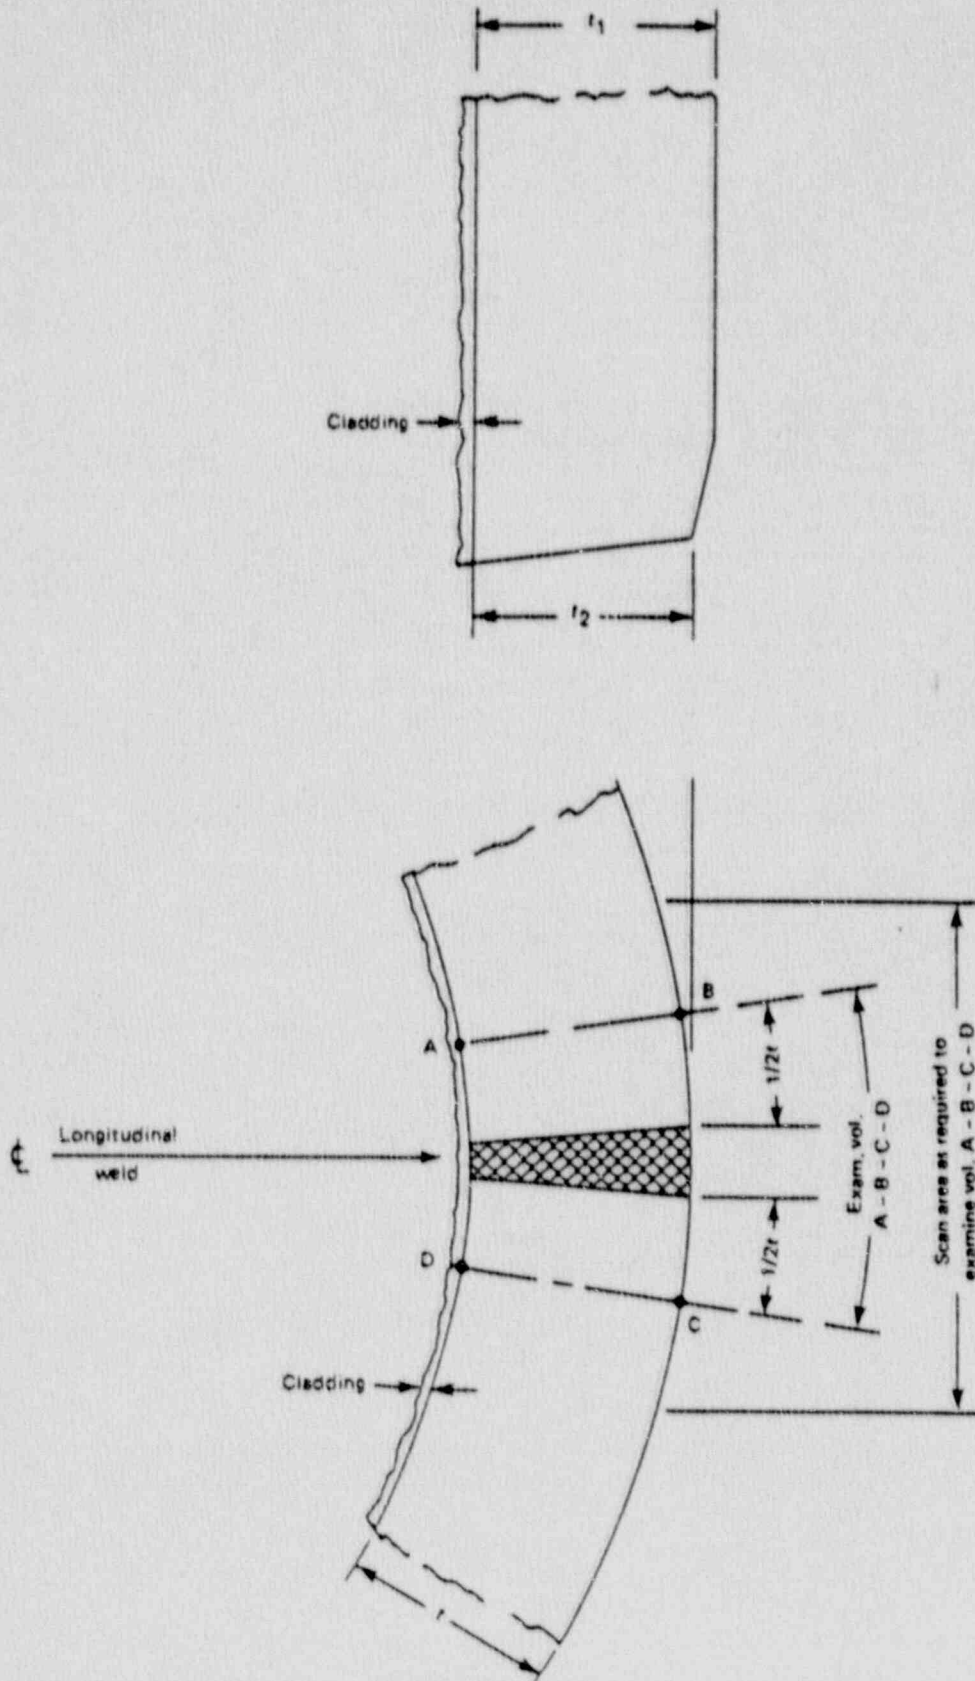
FIG. IWB-2500-2 VESSEL SHELL LONGITUDINAL WELD JOINTS
